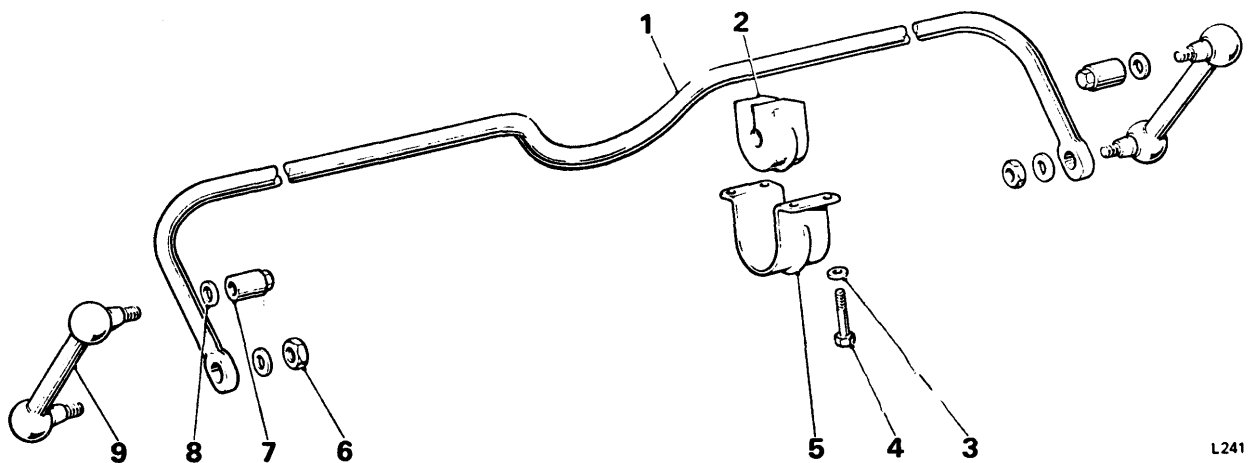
EXPLODED VIEW REAR STABILISER BAR
